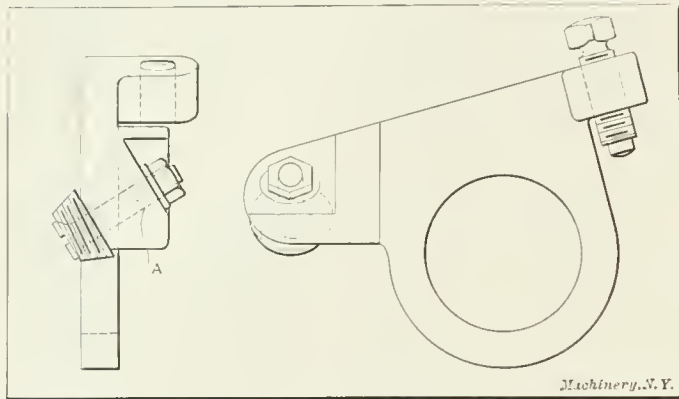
Cross-slide Holder for applying a Thread Roll to a Beveled Piece
